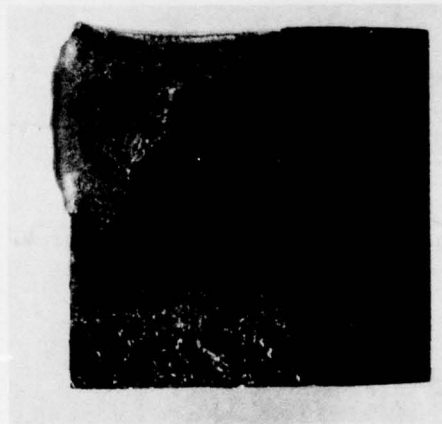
Weld-metal Charpy specimen QSl-3, showing diagonal H<sub>2</sub>S crack front
